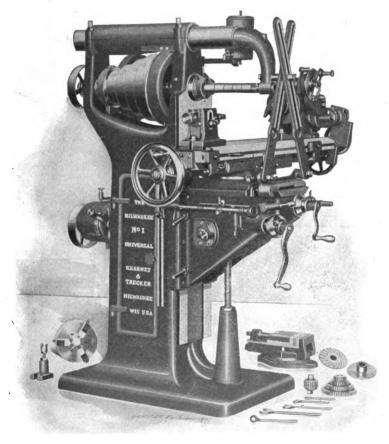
THE MILWAUKEE NO. 1 UNIVERSAL IS AT HOME IN THE TOOL ROOM.
